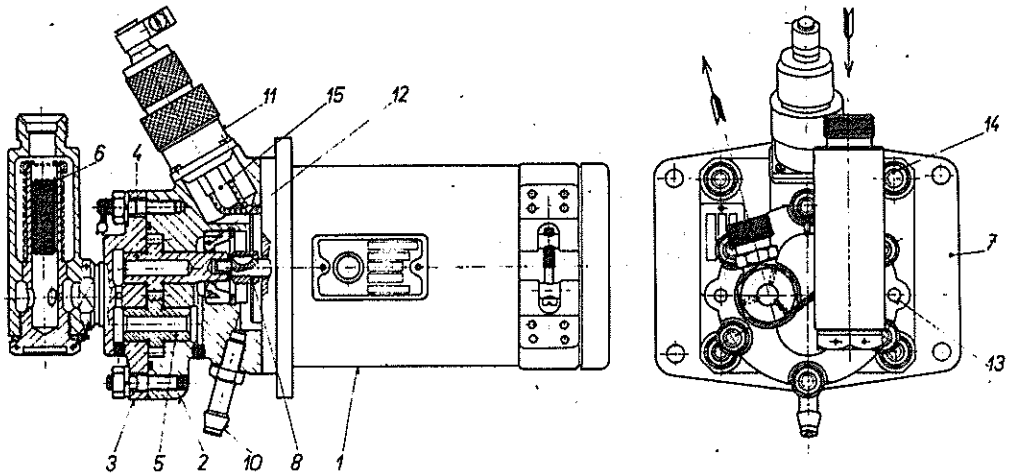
Section view of the LUN 7841 auxiliary feathering pump
